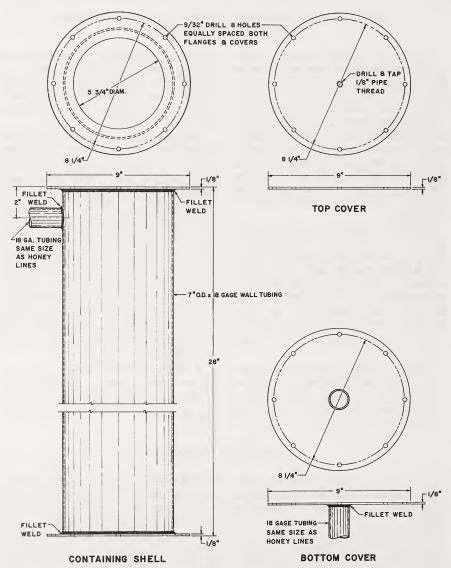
Diagrams showing construction details of the containing shell of the strainer.
